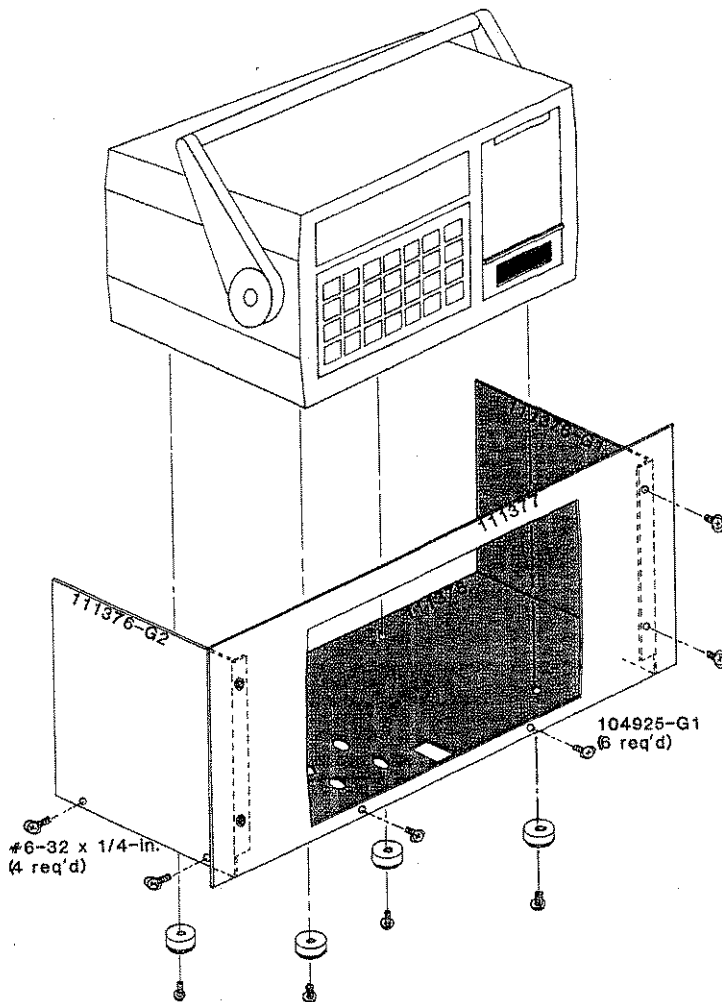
RACK-MOUNT ASSEMBLY.
